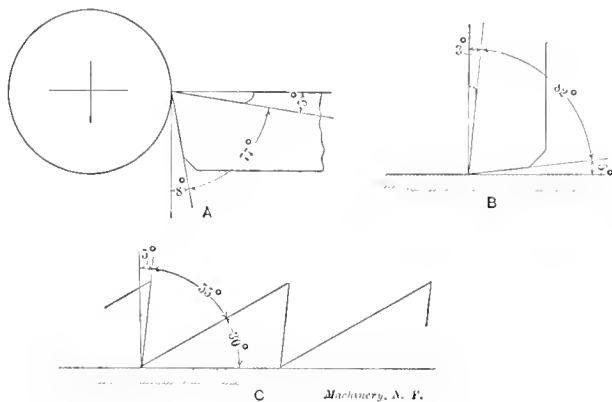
Cutting Angles of Planer Tool, Lathe Tool and File.
